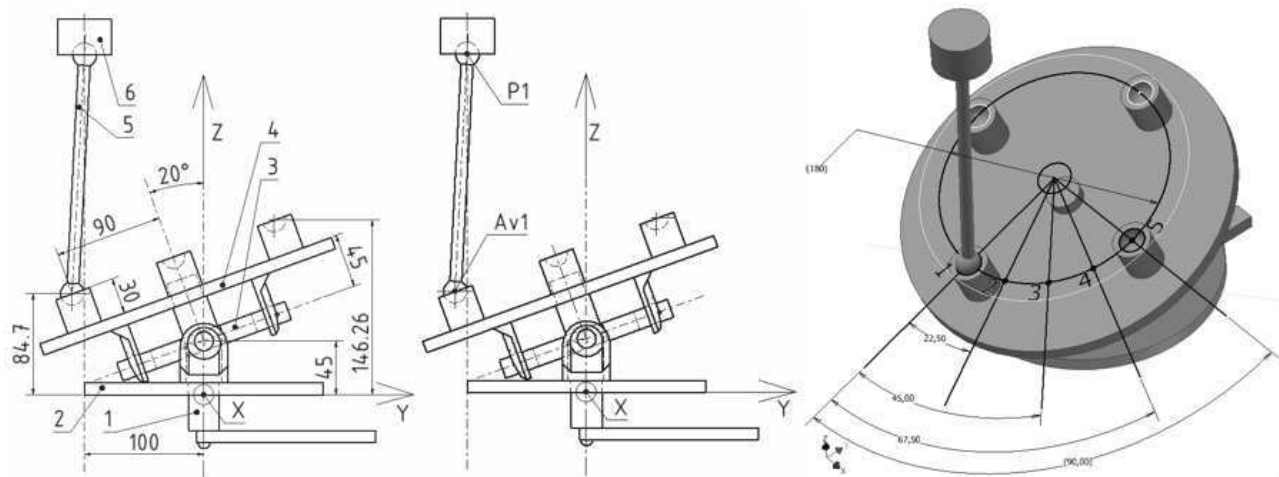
Mechanism with ring- schematic representation (left side): 1- Output shaft, 2- Part of crankcase (fixed part), 3- Ring, 4-Swinging plate, 5- Ball joint segment, 6- Piston, CAD model (right side)
